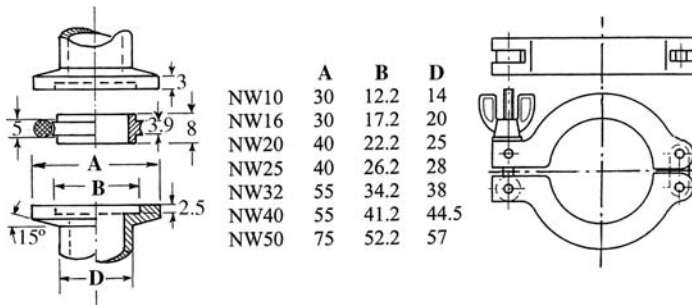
Left: Two identical, opposed small flanges with O-ring and centring ring in-between. Right: Clamping ring, to fit the outer diameter as given in column A of the table (four different sizes). The table plus the drawing gives the relevant dimensions for the seven sizes of small flanges.
